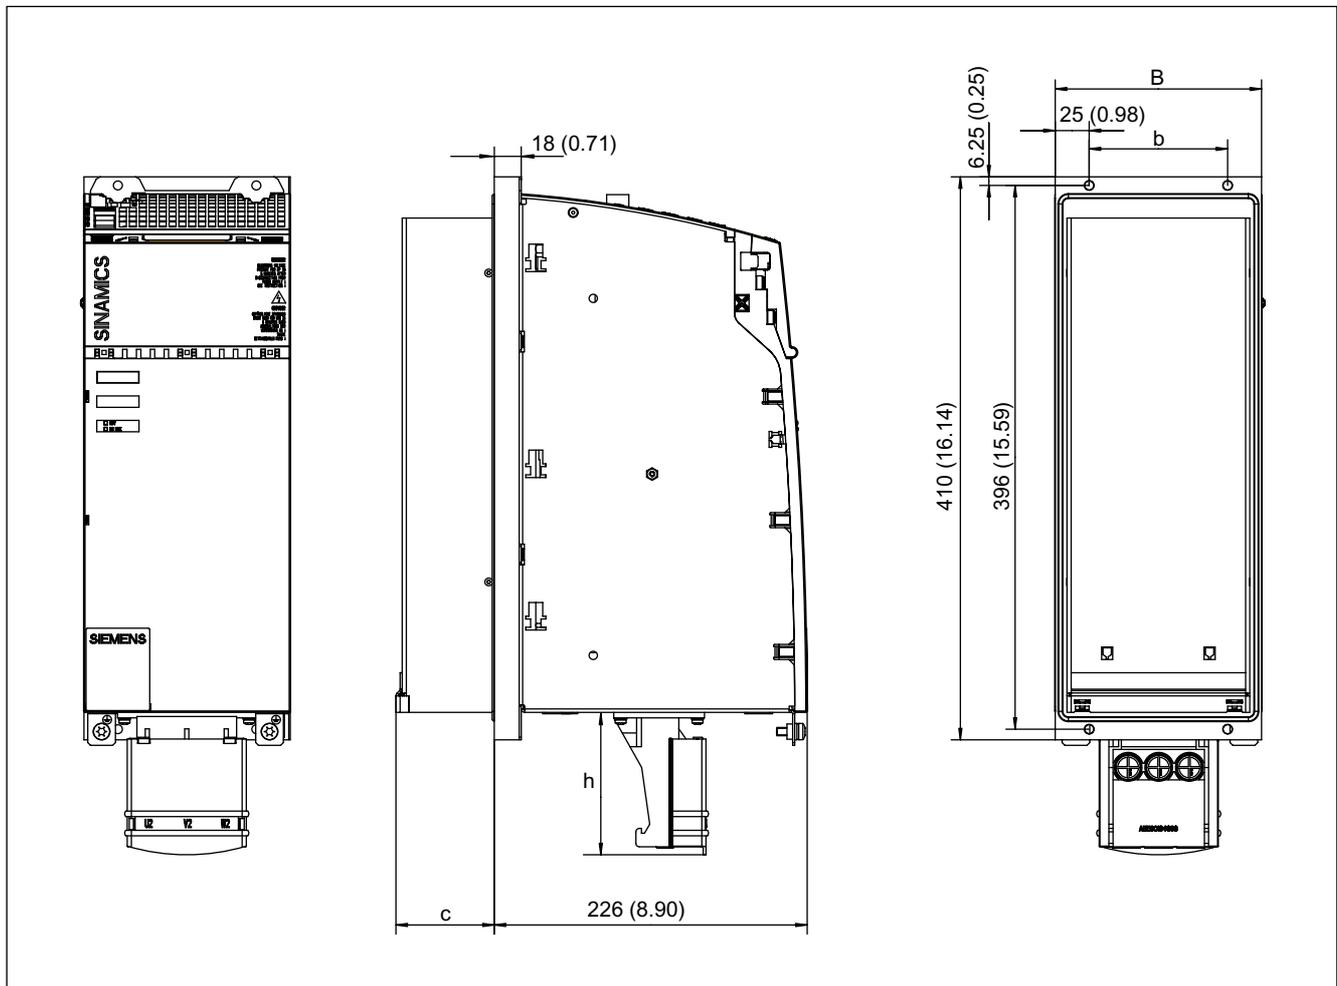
Dimension drawing of Motor Modules with external air cooling 45 A, 60 x 85 A, all dimensions in mm and (inches)
